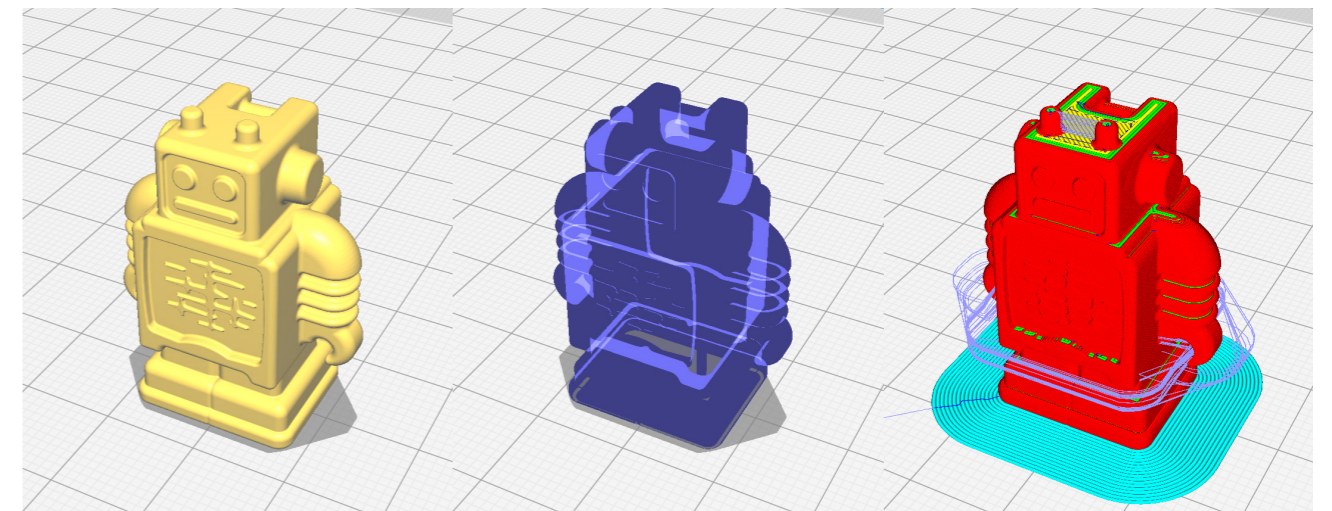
Cura views: solid view (left), x-ray view (center) and layer view (right)
